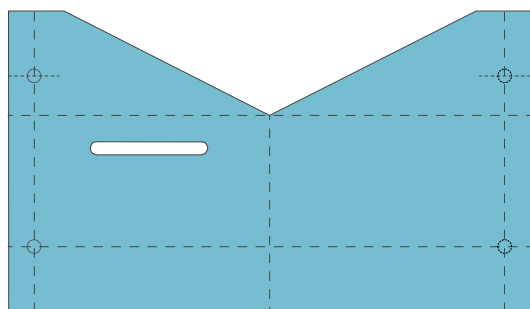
SDC's tap protection: cutting plan of the main steel plate
